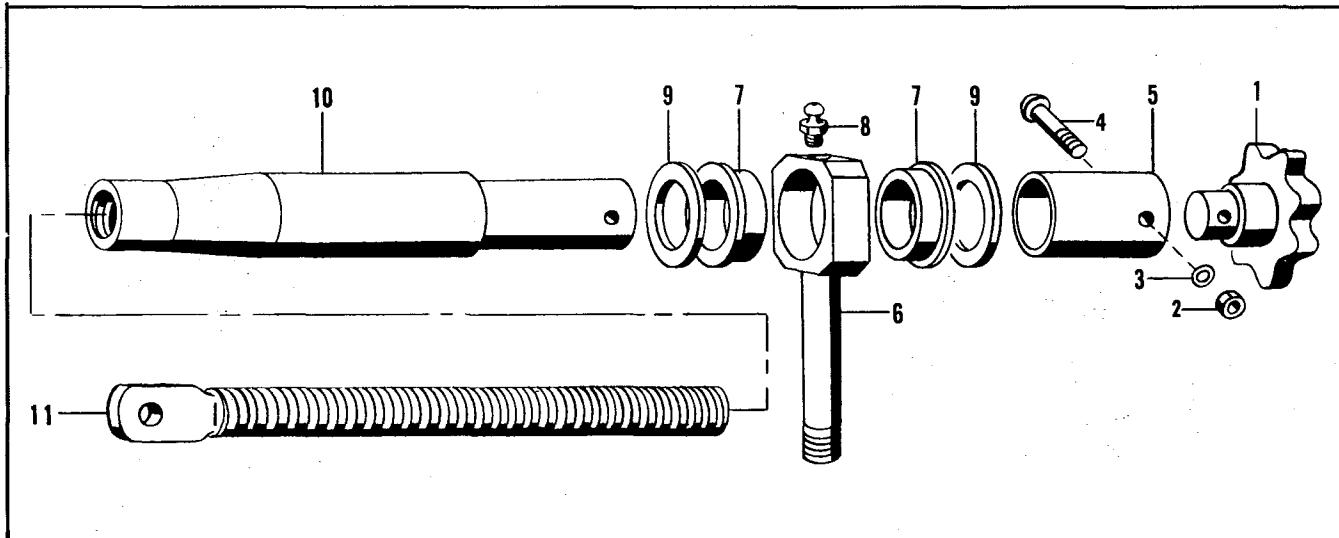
Traverse Adjustment Assembly, Part No. 102088
